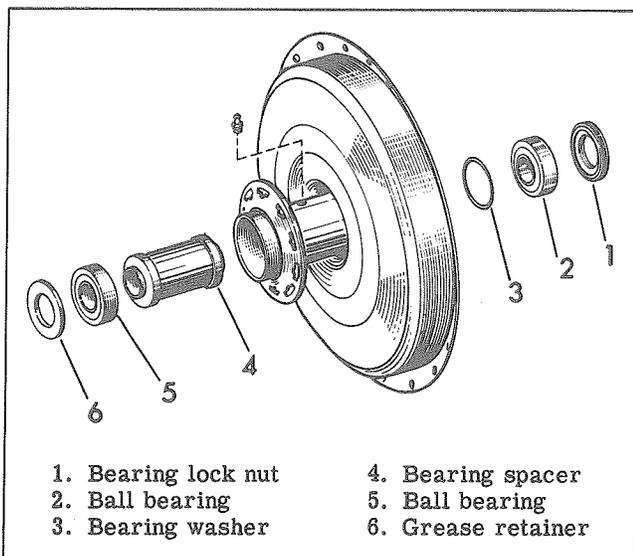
C-11. Front Wheel Hub (1963 and Earlier)
